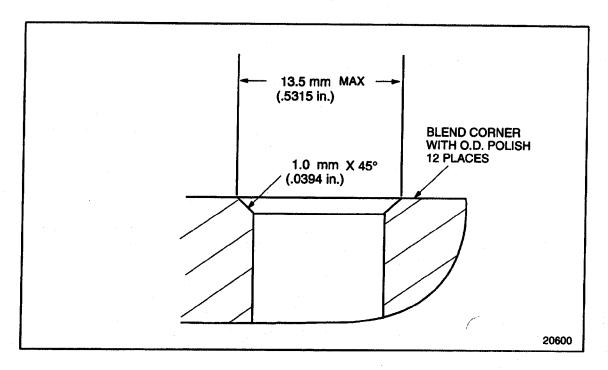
Main Journal Oil Hole Chamfer Limits
